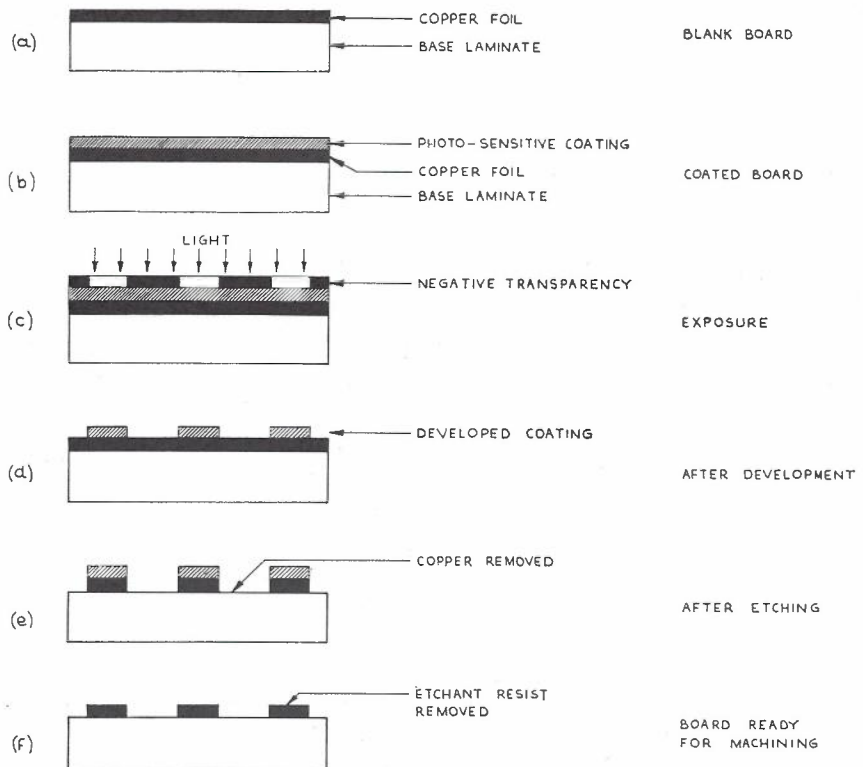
Successive Operations in the Manufacture of a Printed Wiring Board by the Photo-Etching Method.
